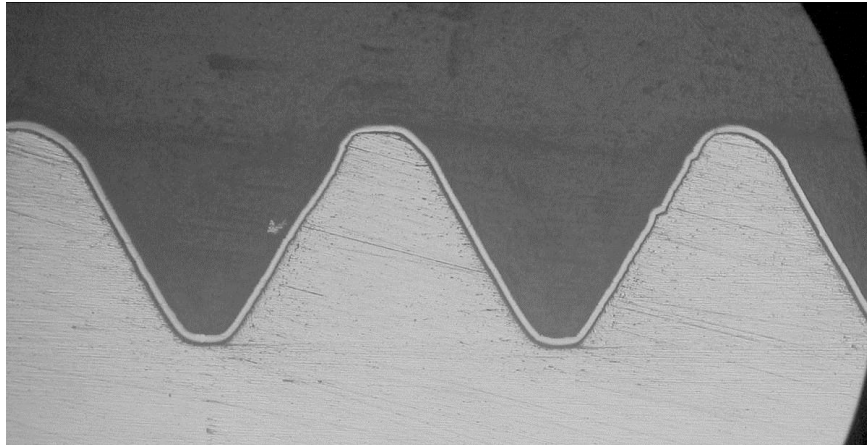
Steel test ring with 50 microns CVD Tungsten Carbide coating crushed to test coating adhesion and toughness – no flaking or coating separation from substrate
